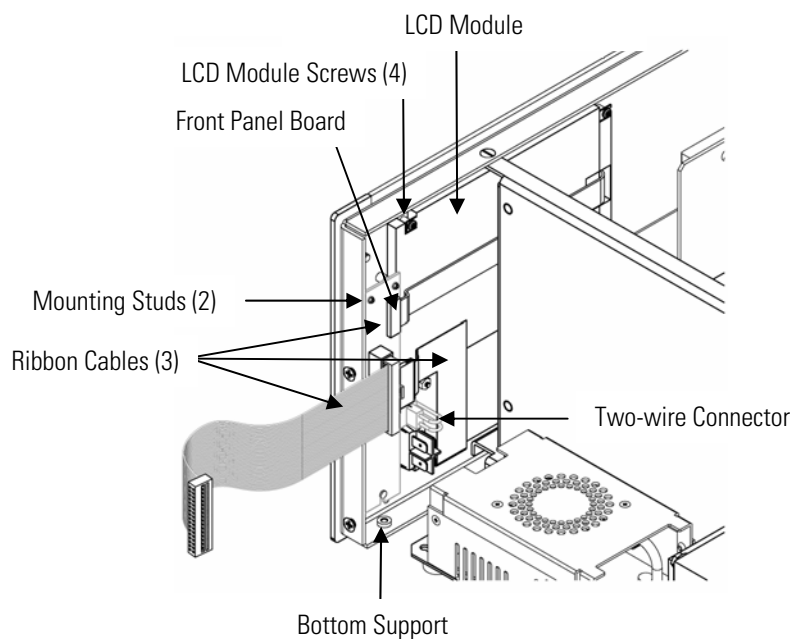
Replacing the Front Panel Board and the LCD Module
